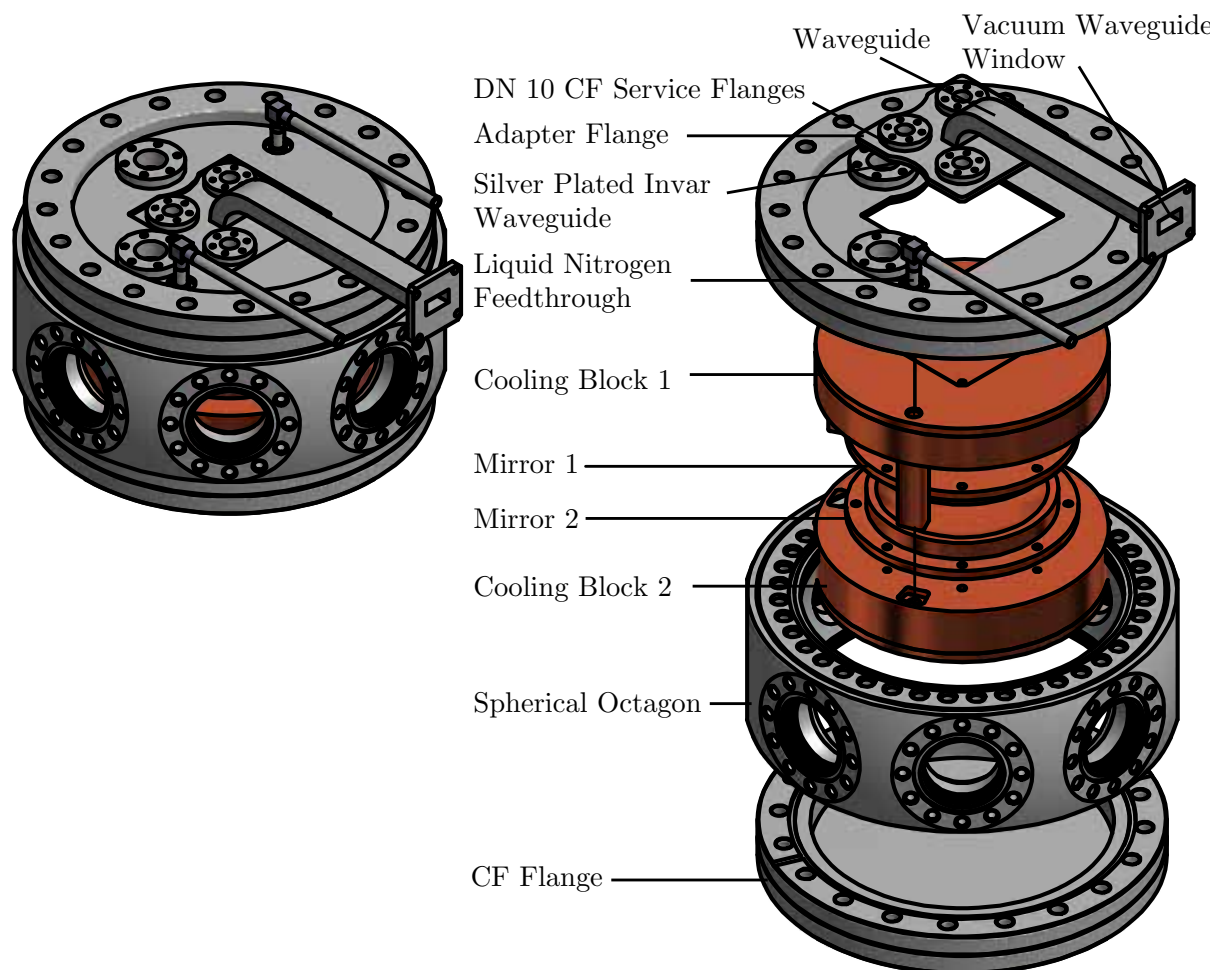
Left: A 1:3 scale drawing of the assembly. Right: An exploded view showing all the individual parts.
